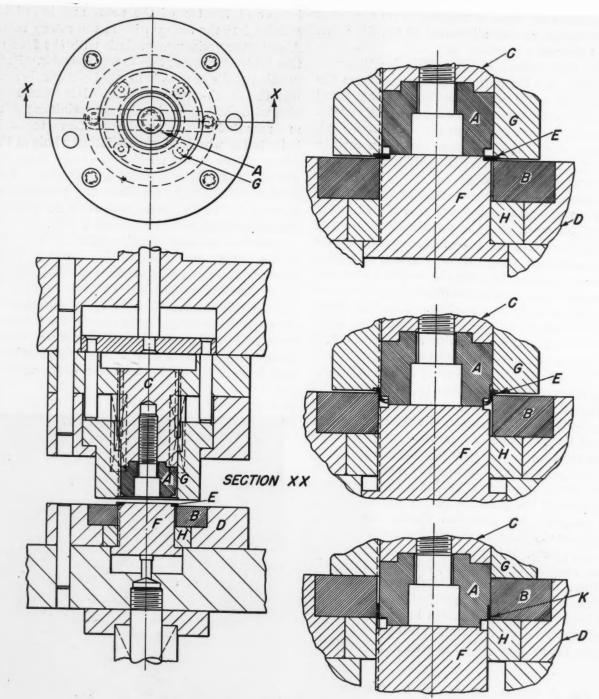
Cross-section of the Carbide Die Shown in Fig. 6
